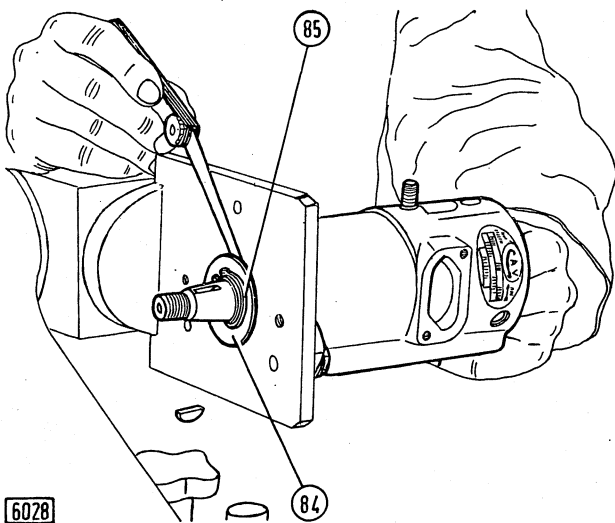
Adjusting the end float using a feeler gauge.
